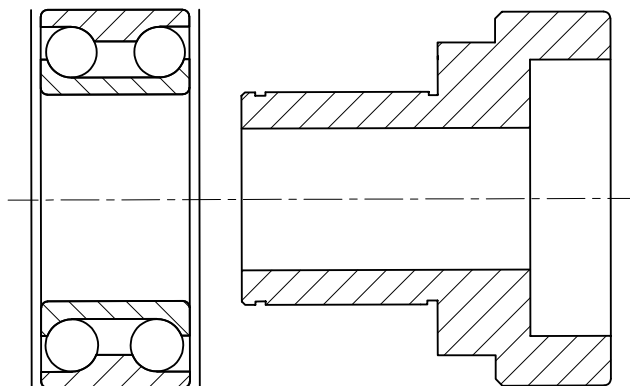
BEARING drawing automatically updated after loading the SHAFT drawing
